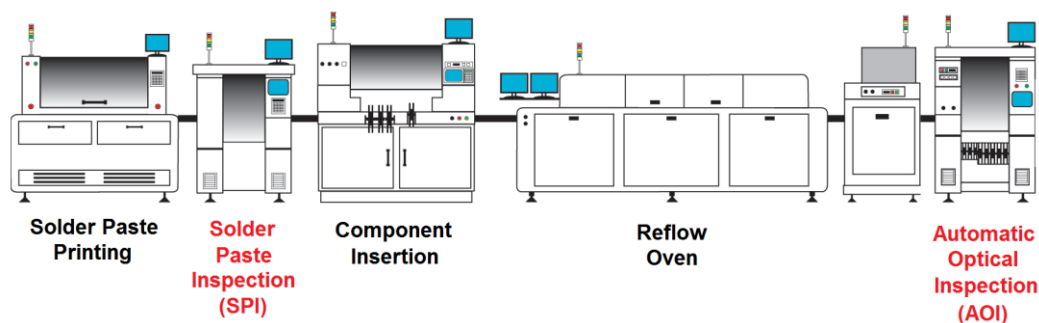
Typical Reflow soldering line used in Bosch Car Multimedia [adapted from [52]].
